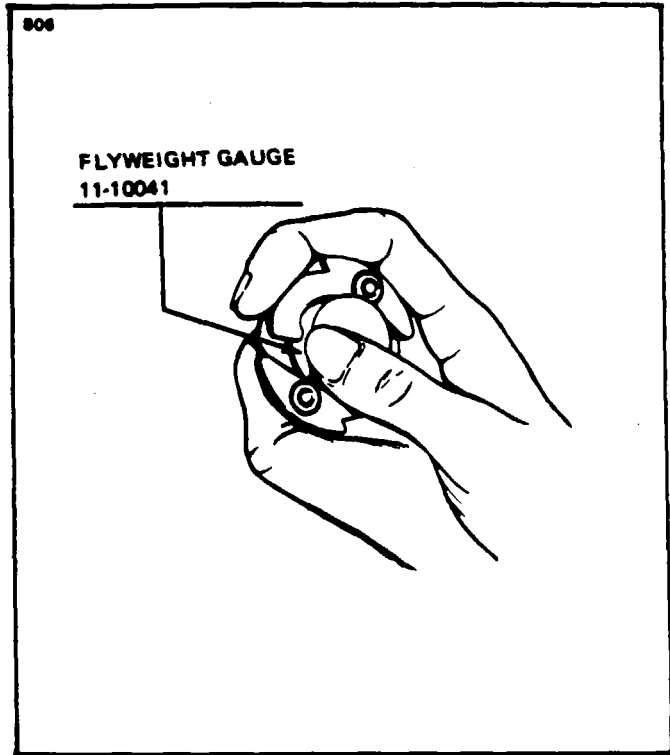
Checking Flyweight Radial Wear with Gauge
